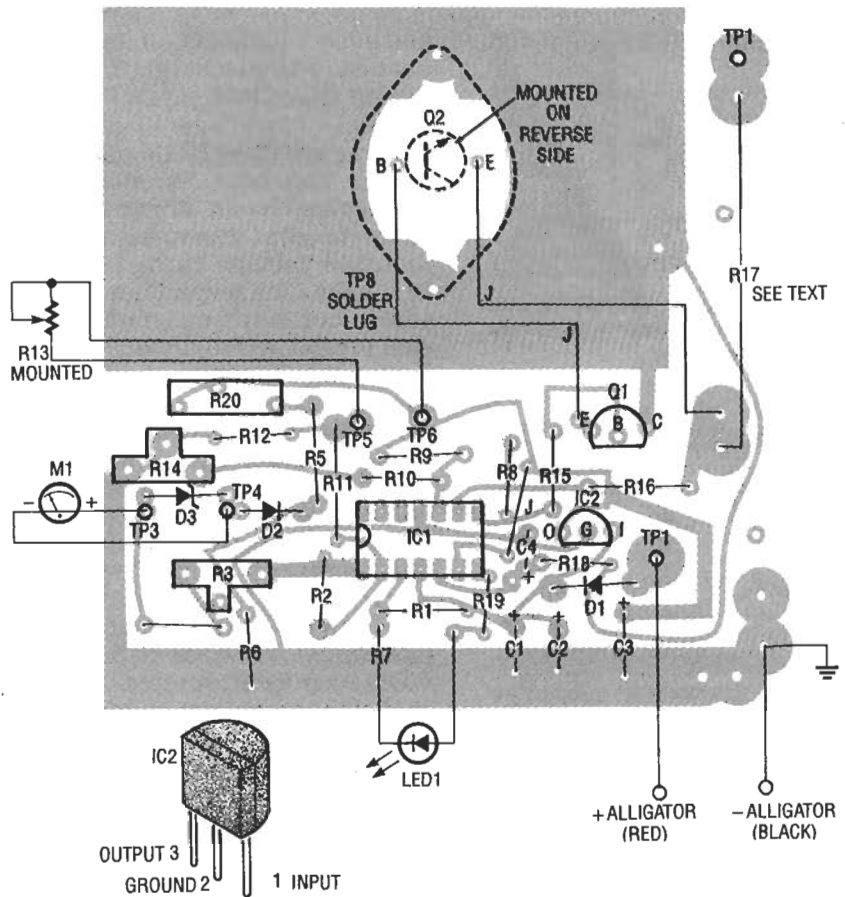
PARTS-PLACEMENT DIAGRAM for printed circuit board of CRAE.
